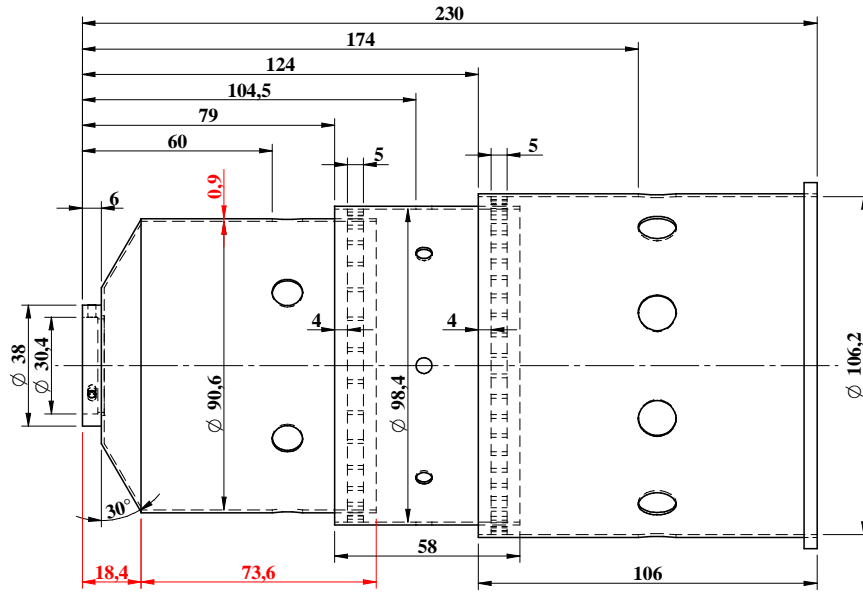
A detailed drawing of the Metal combustor. Red dimensions vary between the metal and Perspex combustors.
